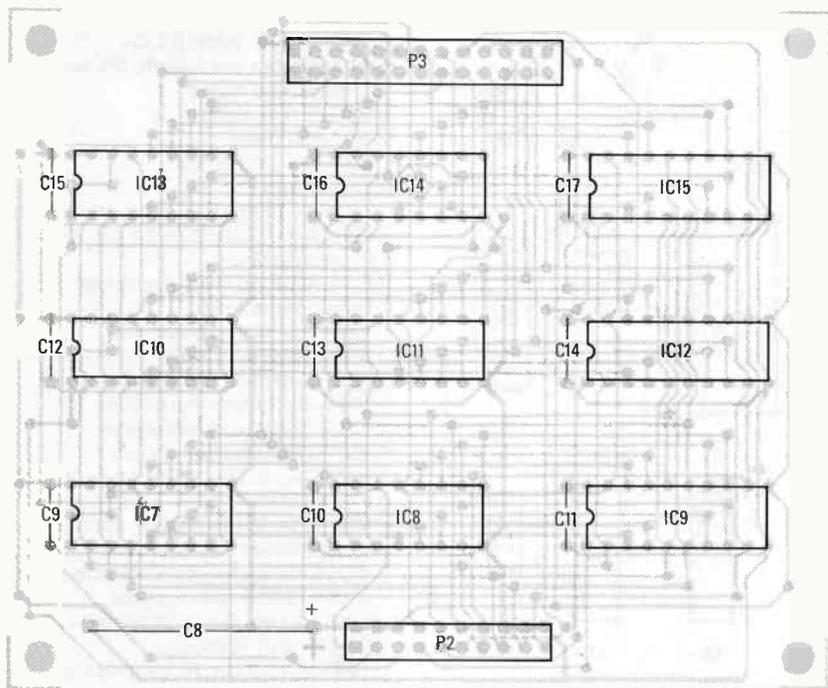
STUFF THE DRIVER BOARD as shown here. Mount all parts on the component side of the board.
